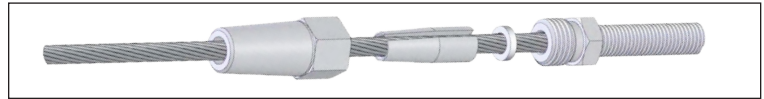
Figure B. Insert cable into Receiver Cone, Wedge and Spacer until it is fully seated in the Threaded Stud.
